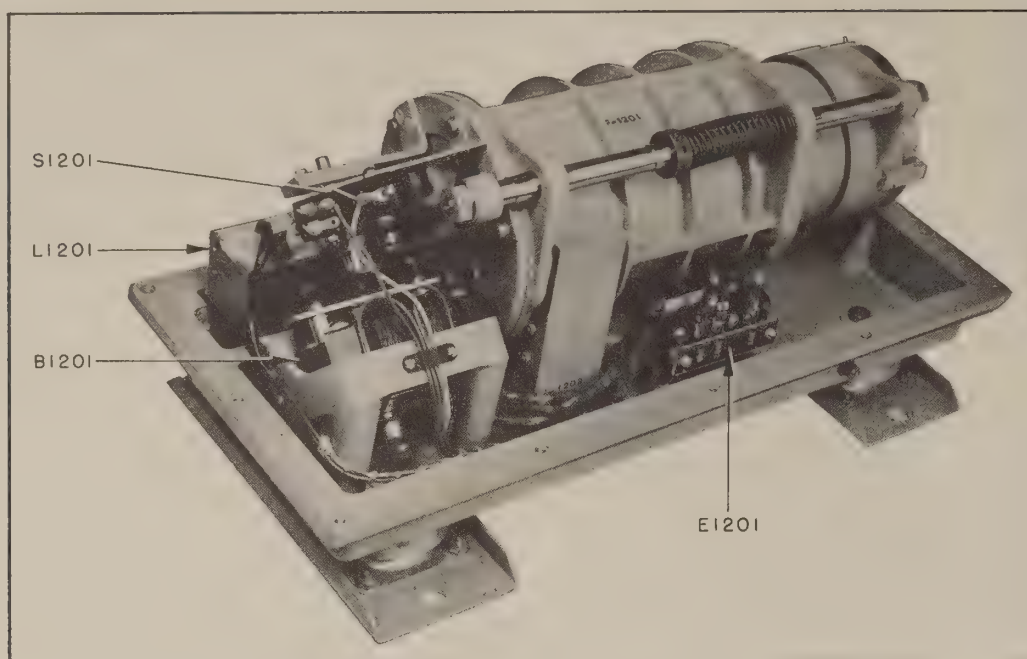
Tuned Cavity FR-66/UP: Component Locations
